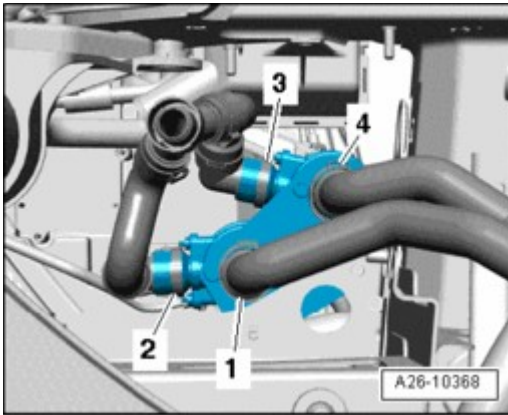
Removing Air Guide Hoses From Secondary Air Injection Combi-Valves
